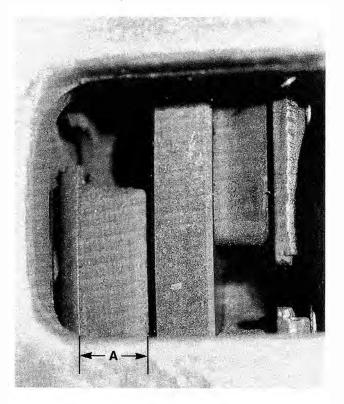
Disc brake pad wear being checked through opening in caliper. Minimum brake pad thickness shown by dimension A.
